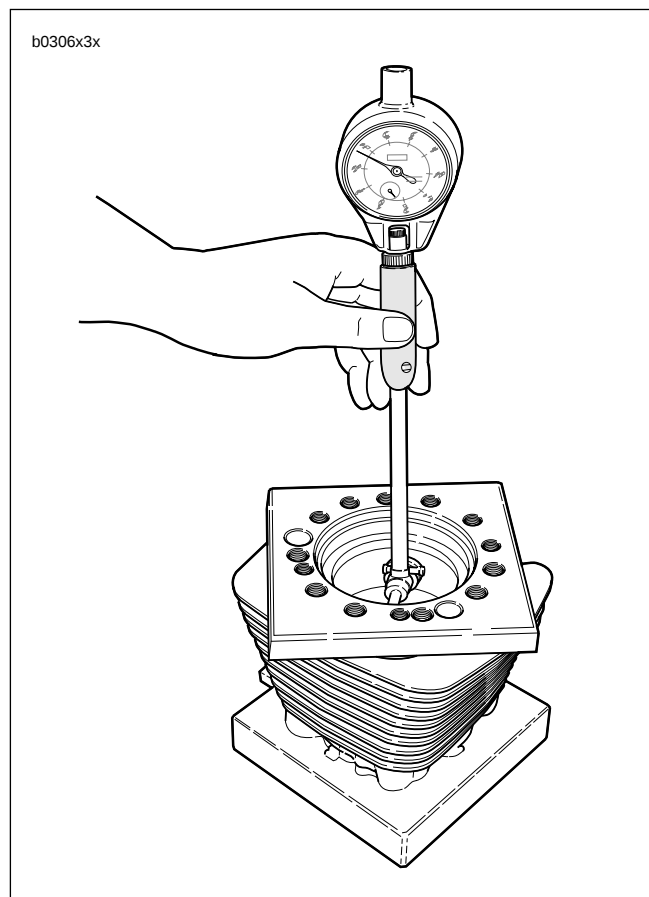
Measuring Cylinder Bore Using Torque Plates (Part No. HD-33446A)
